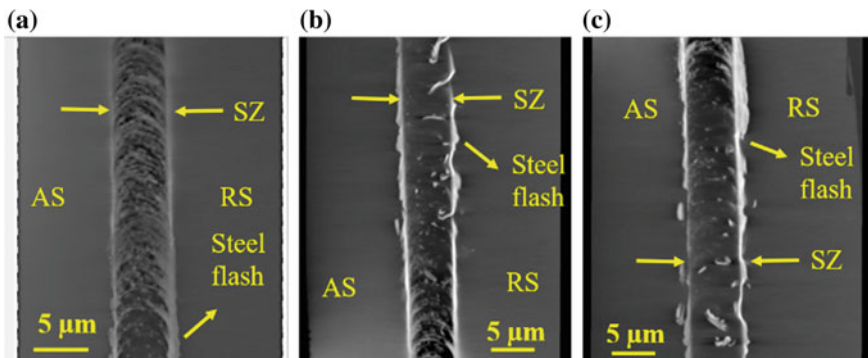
X-ray micro-CT scans of welded samples at a pin diameter of a 4 mm, b 5 mm, and c 6 mm
